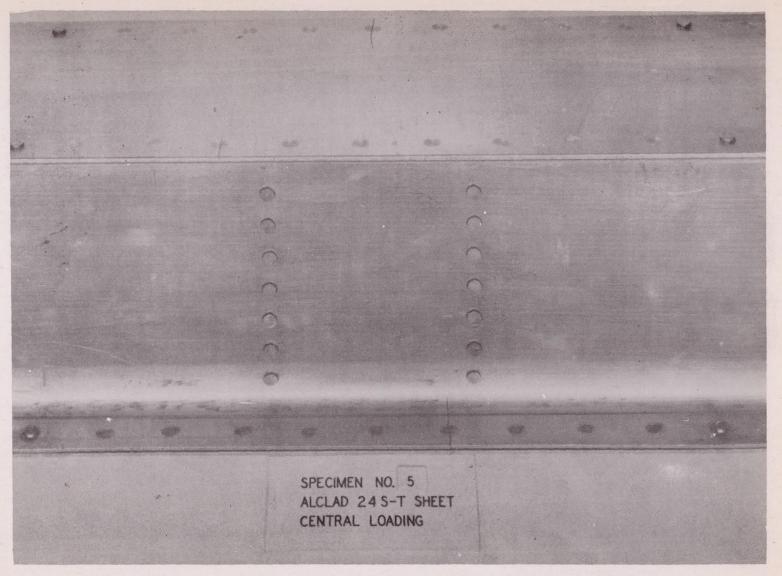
Spot-weld fracture after failure in fatigue. Bending stress, ± 3460 pounds per square inch.
